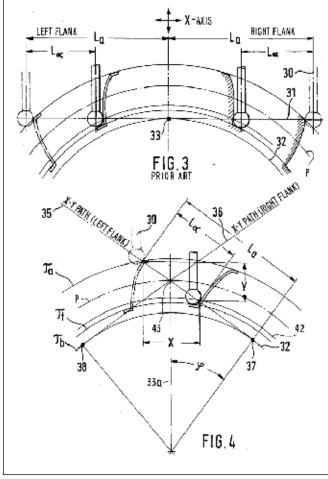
Figures 3 and 4 of the U.S. Patent No. 4,852,402, "Method and Apparatus for Checking or Testing the Profile of Gear Flanks, Particularly of Involute Gears."
